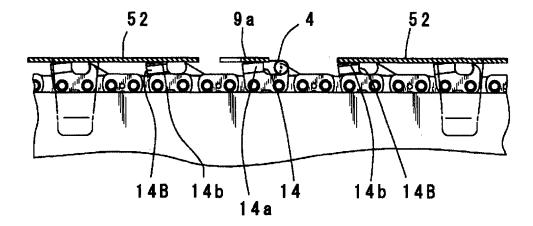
is a front cross sectional view showing the grinding operation using a saw chain sharpener of the present invention, in which an upper surface 14a of a cutter blade 14 is ground by a grinding tool 4 rotating at a high speed.
